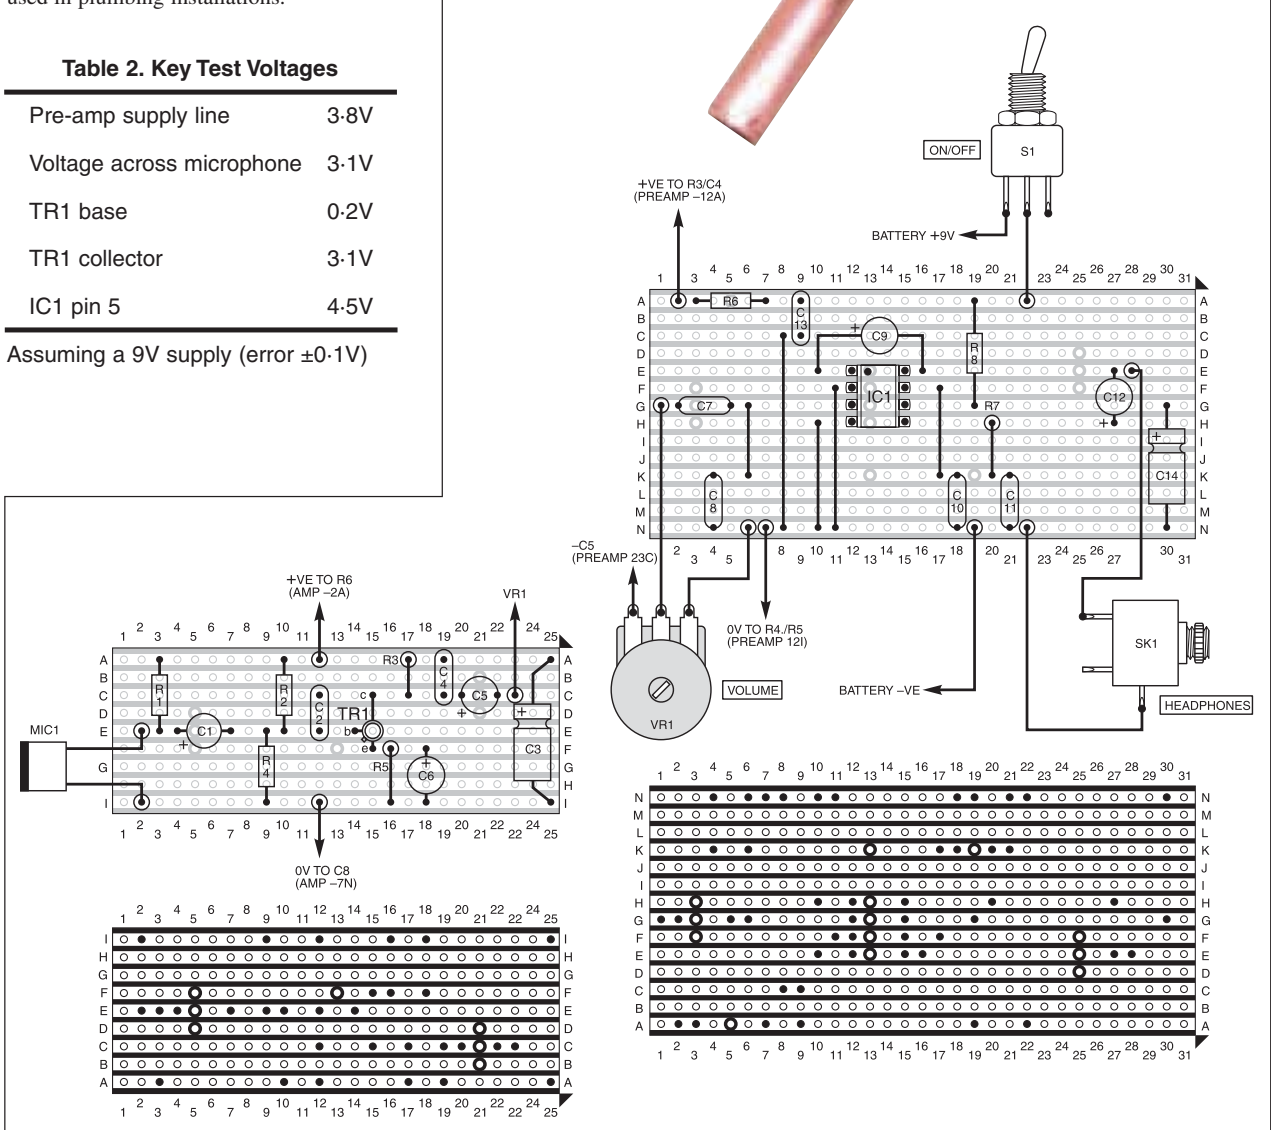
Super-Ear Audio Telescope stripboard component layouts, interwiring and details of breaks required in the copper tracks of the preamplifier and amplifier boards. The wiring and positioning of the two boards within the two-piece aluminium case is shown in the above photograph
